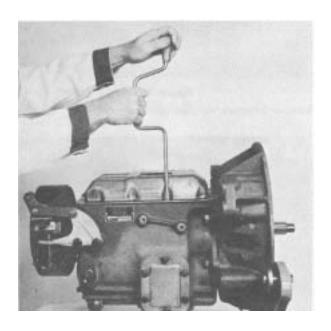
Tighten shift support cover bolts 20 to 25 ft. lbs. torque $[27,3-33,8\ N.m.]$.
